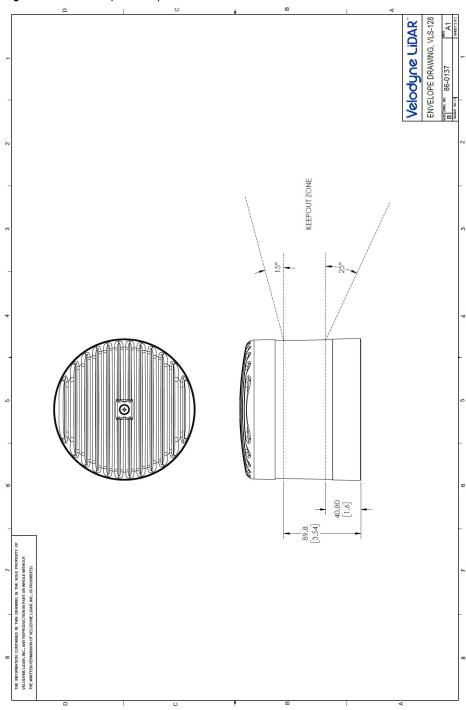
VLS-128 Mechanical Drawing 86-0137 REV A1
